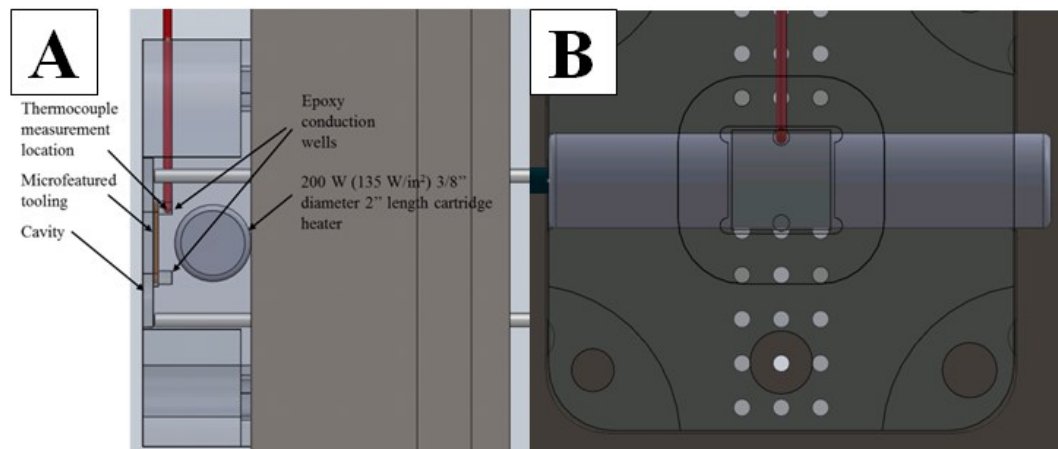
Side (A) and front (B) view of back half mold assembly containing aluminum insert with embedded cartridge heater.
